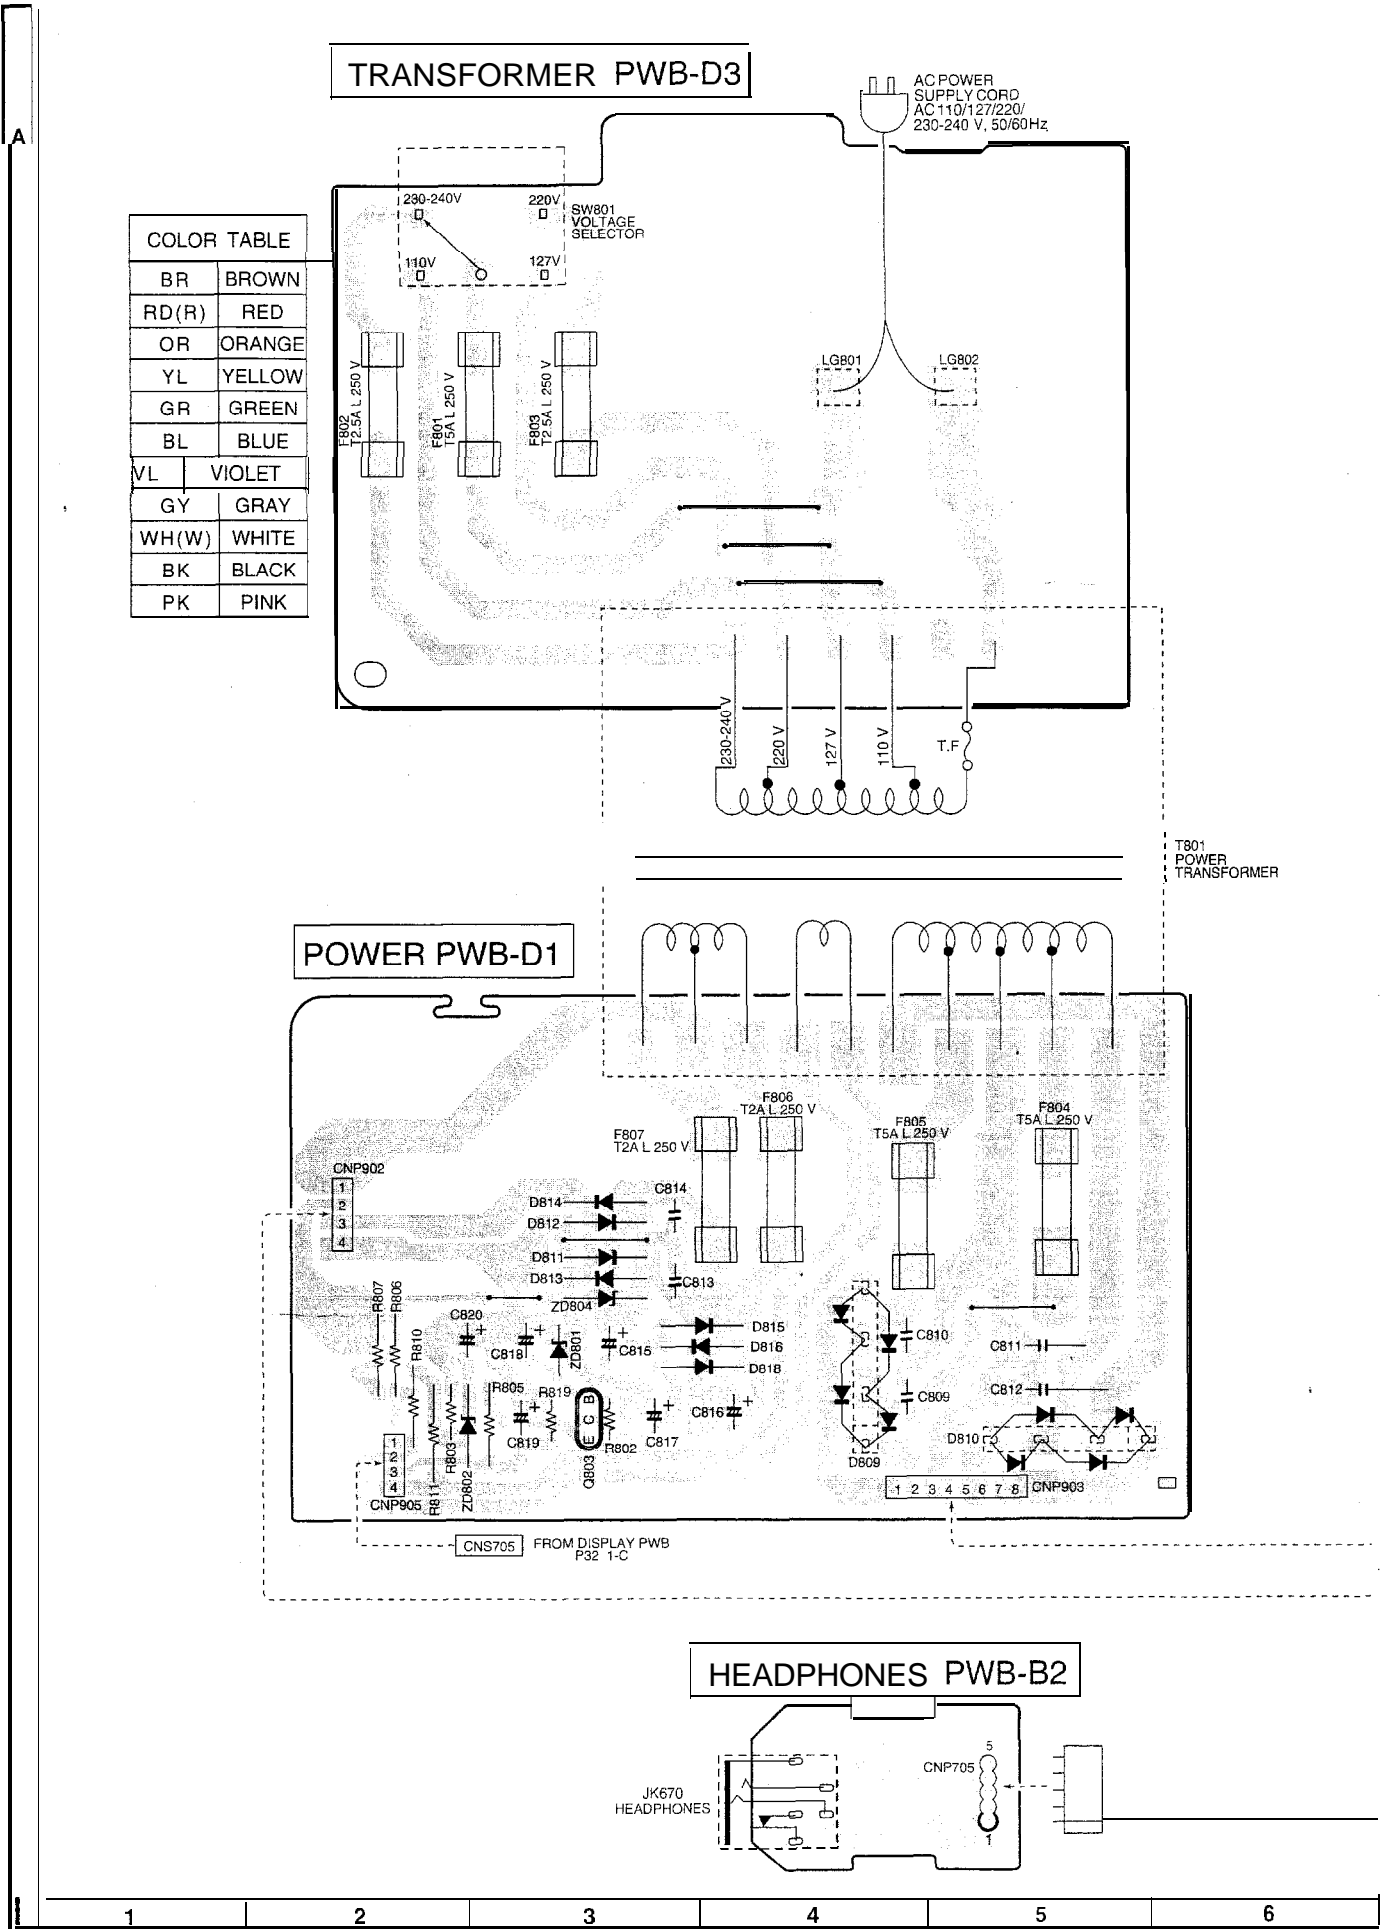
WIRING SIDE OF P.W.BOARD (6/9)
